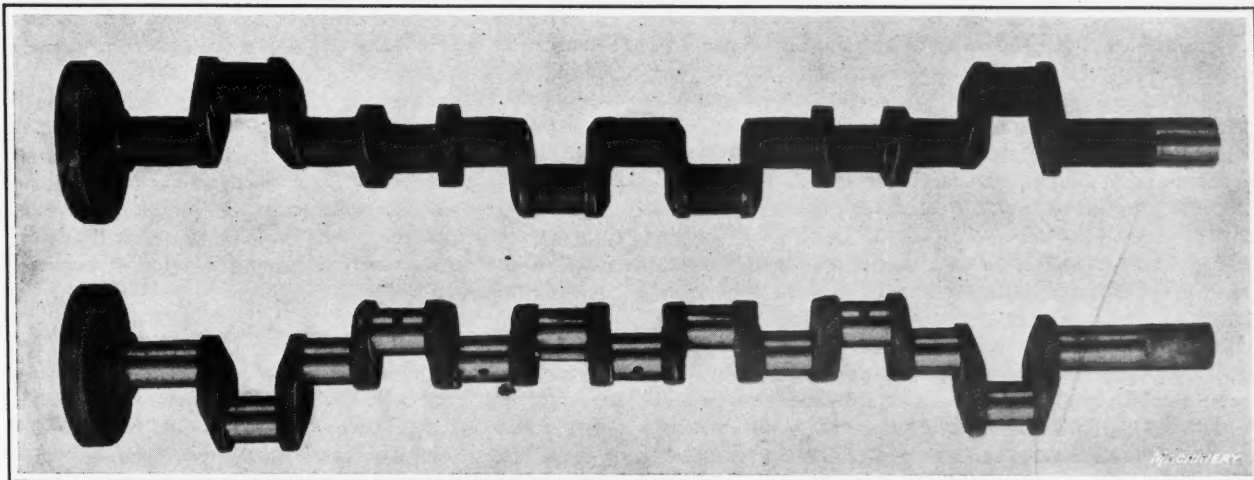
(Upper View) Crankshaft Ready for Copper-plating Process, the Bearings having been covered with Tape. (Lower View) Crankshaft after the Webs and Ends have been copper-plated to prevent Carburization
